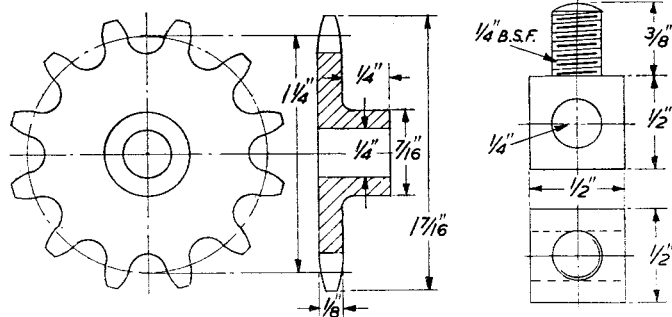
Stop indexing pinion and bearing block (1 off each).
